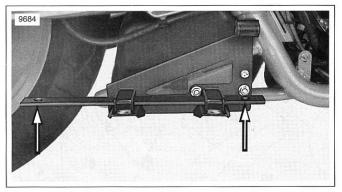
Exhaust Support Fastener Locations (Exhaust System Removed)
